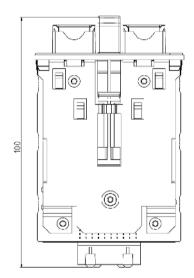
MM900 dimension drawing 1: Electrical RJ-45 ports with securing collar
